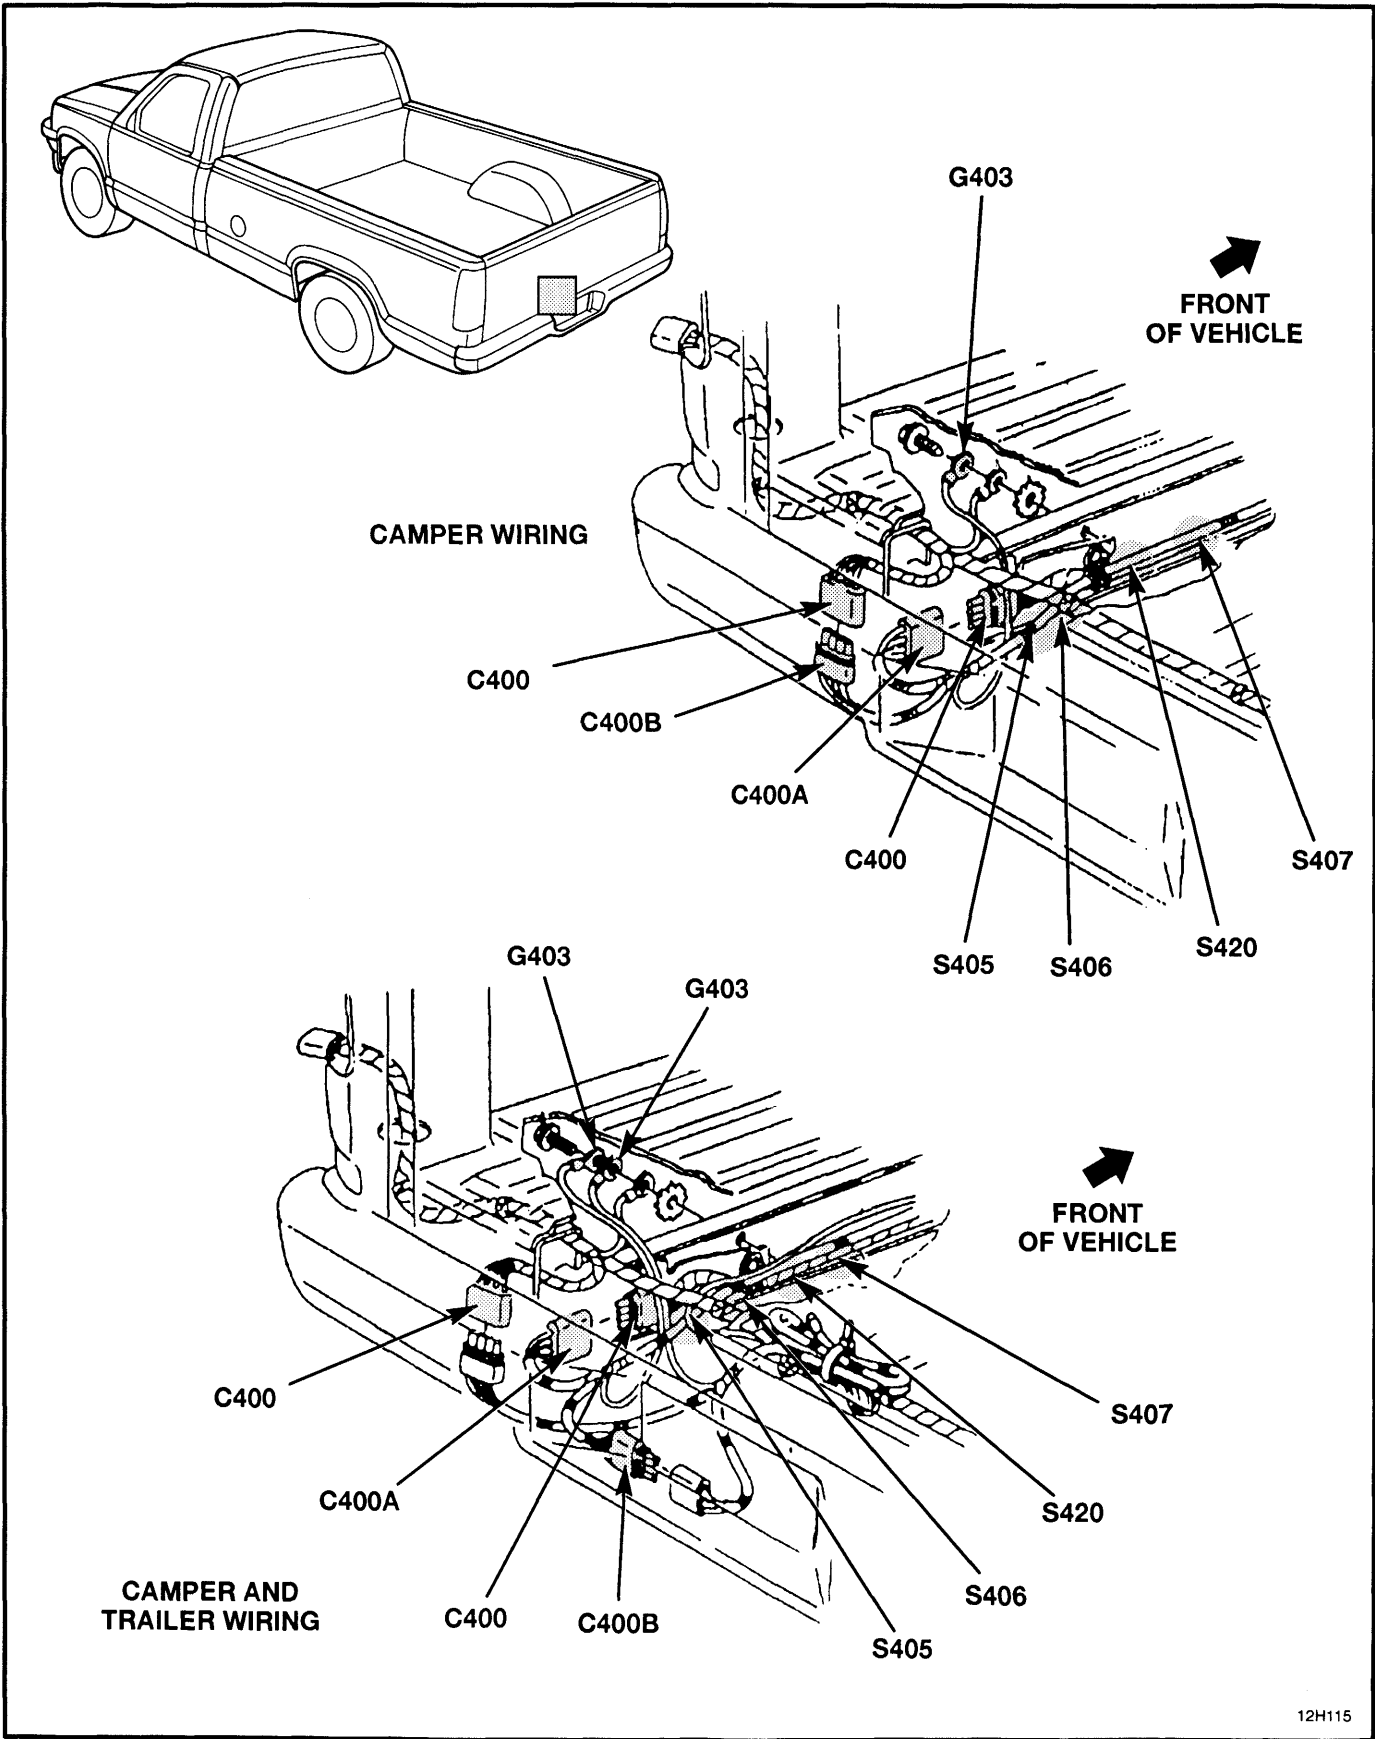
Heavy Duty Trailer and Camper Rear Lamp Wiring, 2 Door Pickup
